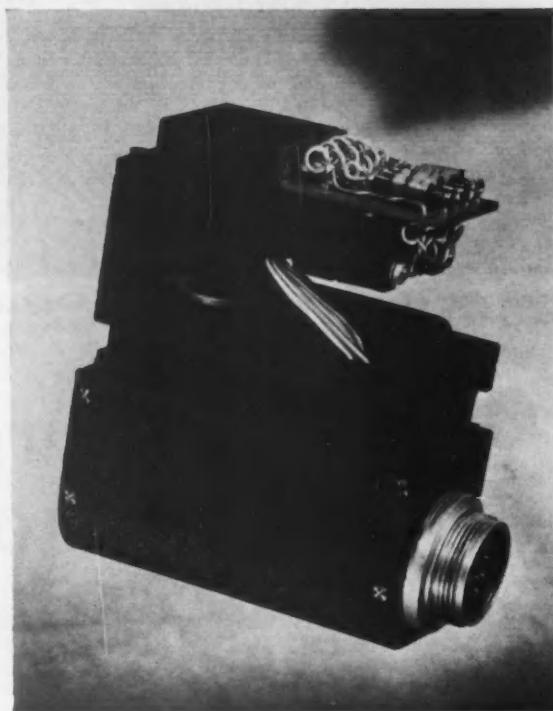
Complete optical assembly suitable for fitting to a machine tool slide
